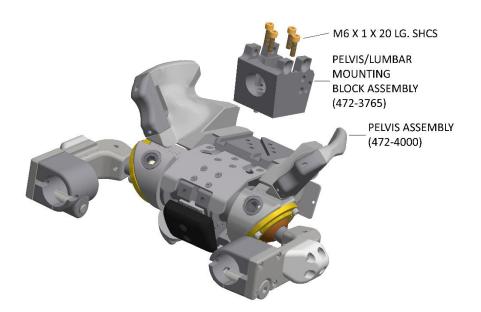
Attachment of Pelvis/Lumbar Mounting Block to Pelvis
